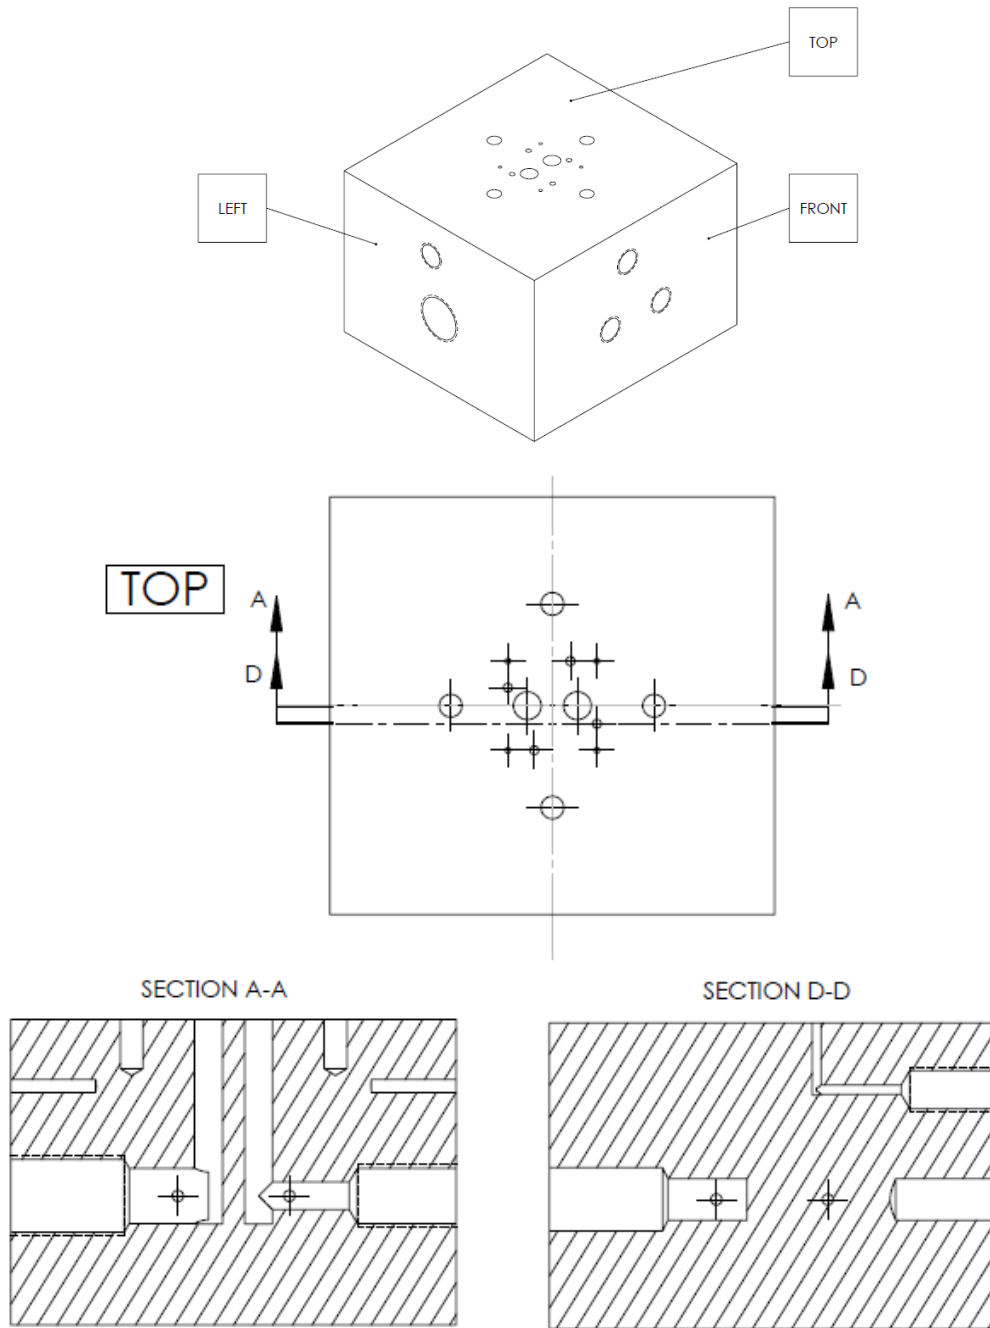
Technical drawings of the manifold base for the test vehicle with a  $9 \times 9$  array of heat sinks; all dimensions in inches unless otherwise specified.
